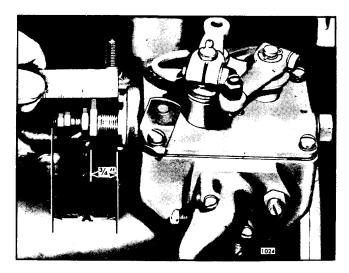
Preliminary Adjustment of Low and High Speed Springs
